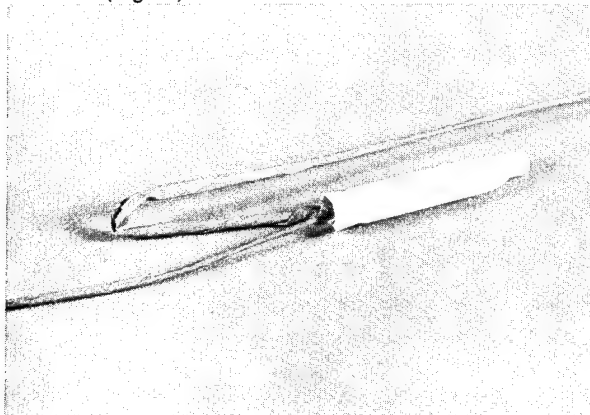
B-Wire Connector with wrapped paper insulated conductor, showing shiner at bend.
